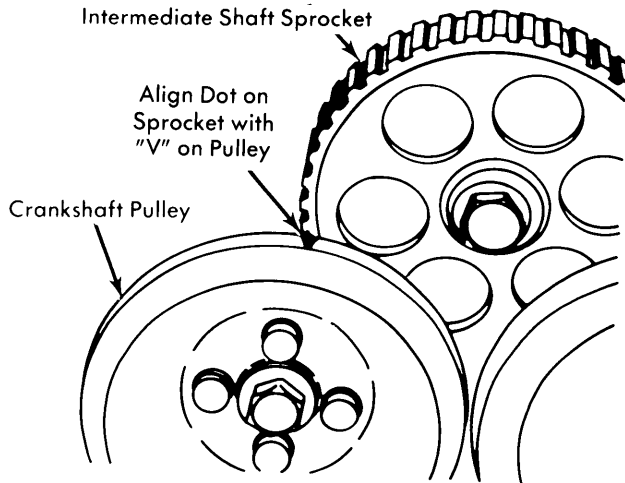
Crankshaft and Intermediate Shaft Index Marks Aligned with Notch on Pulley
